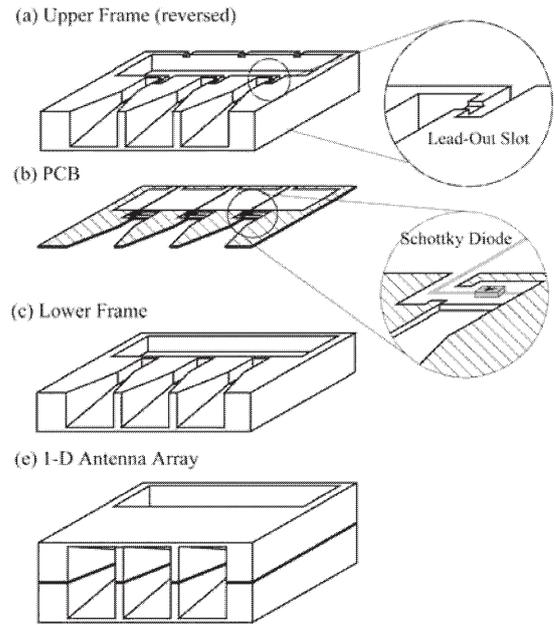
Schematic view of the 1-D horn antenna array assembly. (a) reversed view of upper structure, (b) PCB, (c) lower structure, (d) completed form.
